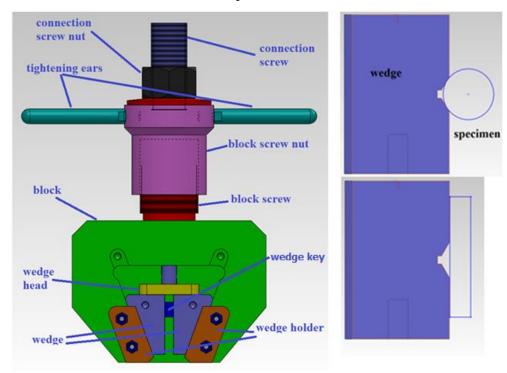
Wedge type tensile test machine grip(left) and specimen position(right)
